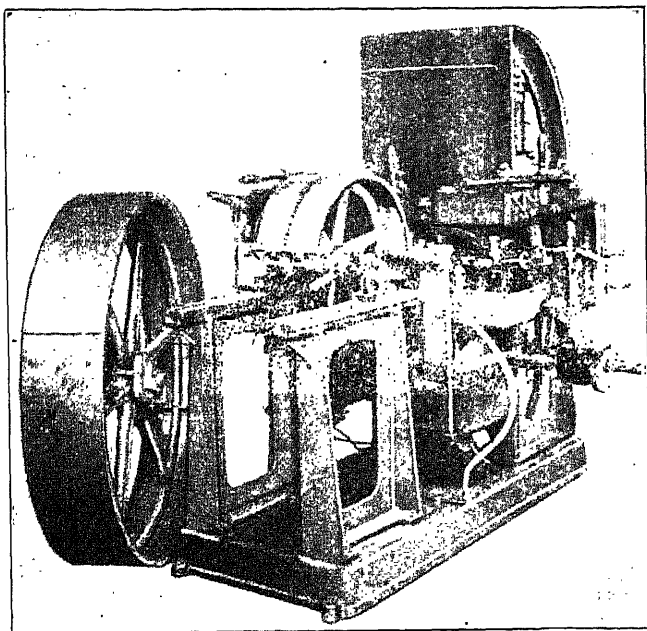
Automatic Electric Pulley Welder.
